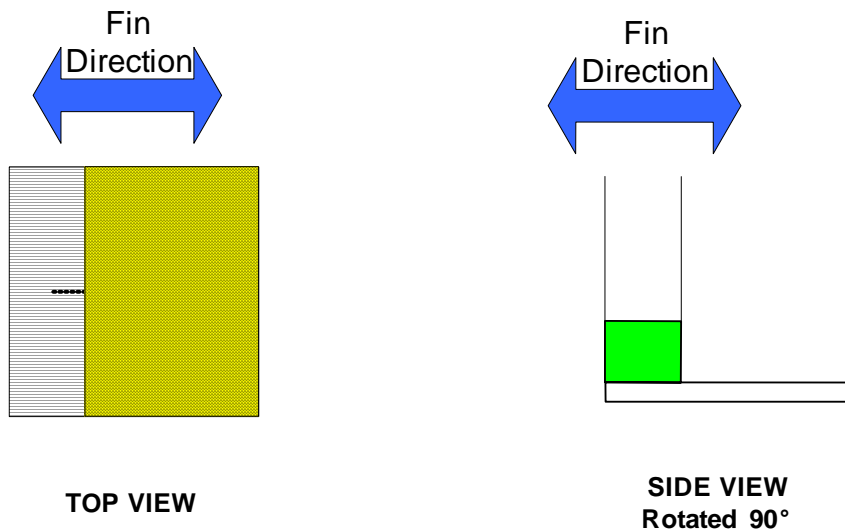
Passive North Bridge (BGA) Heatsink Top/Side View
